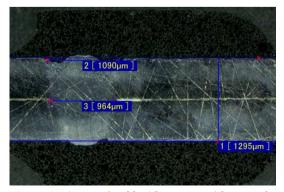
Picture of weld without gap, with 4 mm defocus
